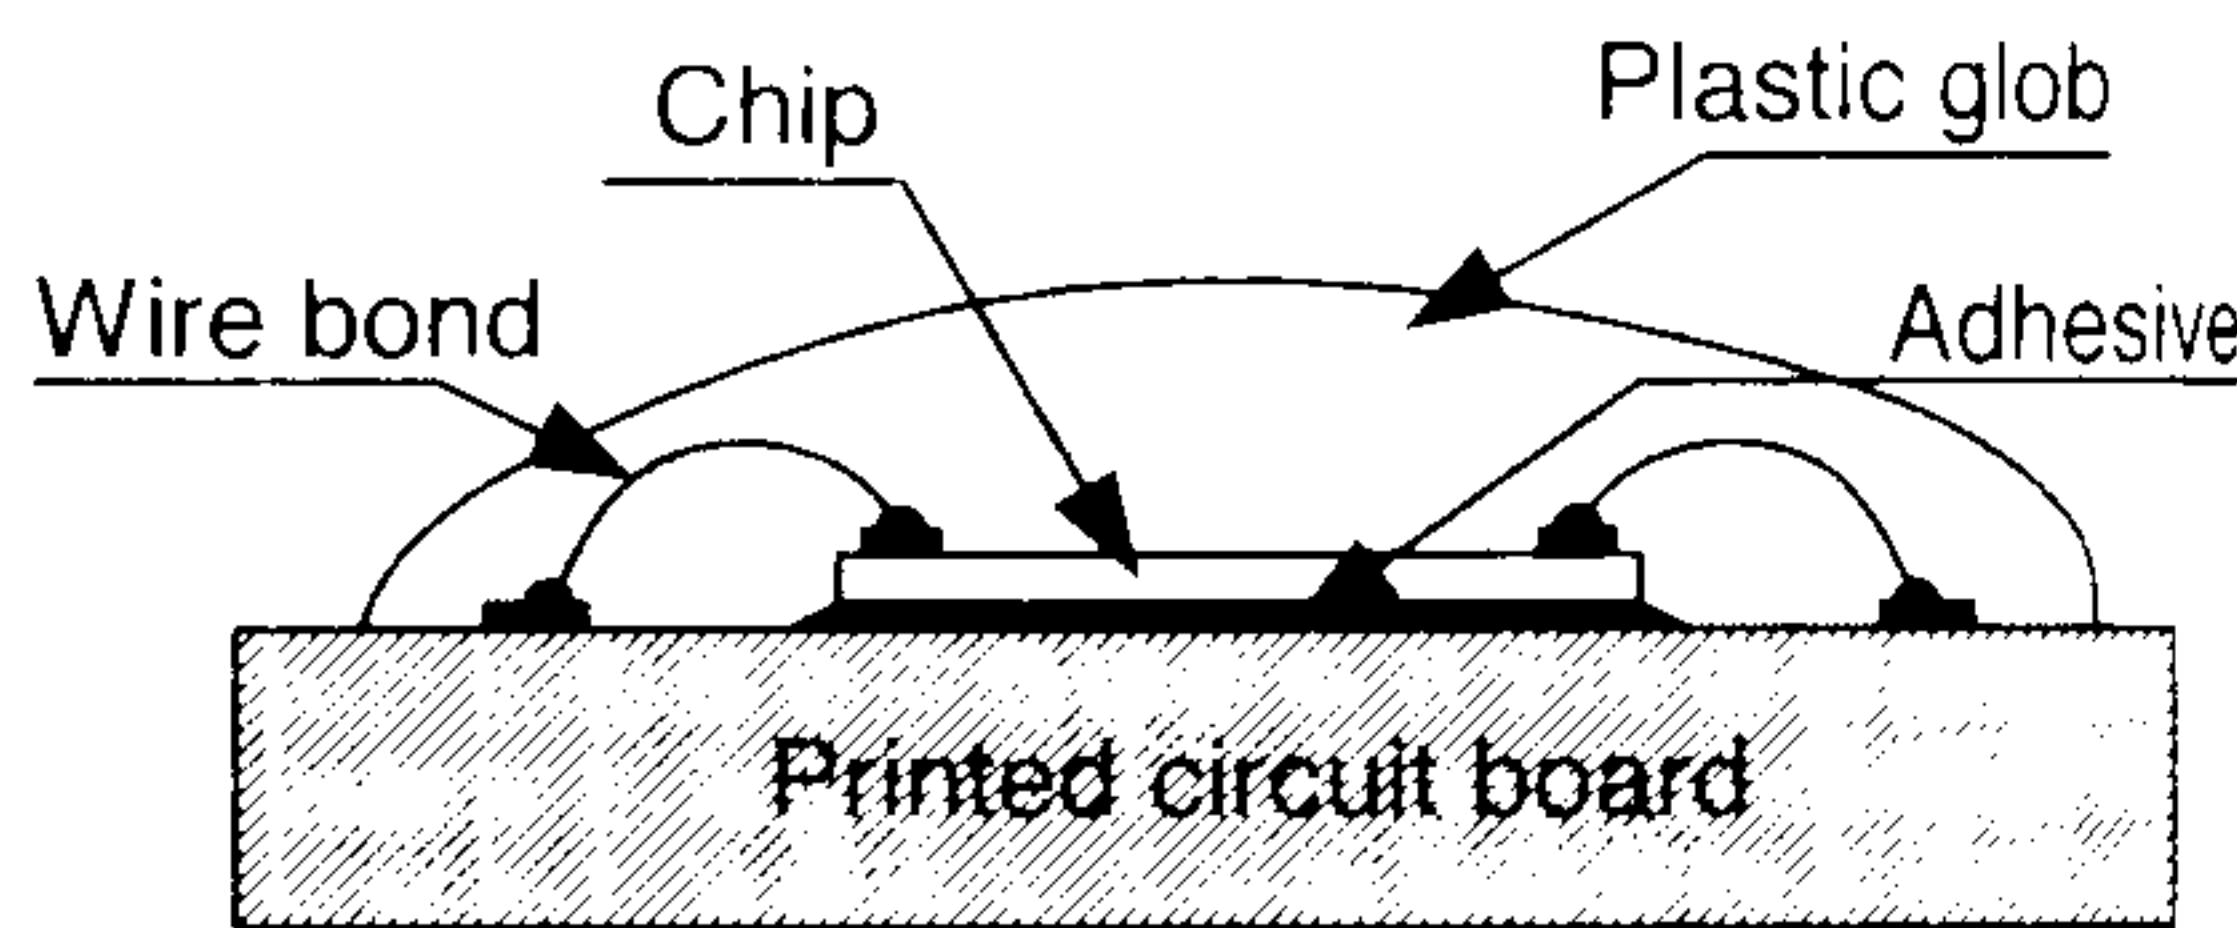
Illustration of chip-on-board packaging that eliminates the first level chip carrier.
